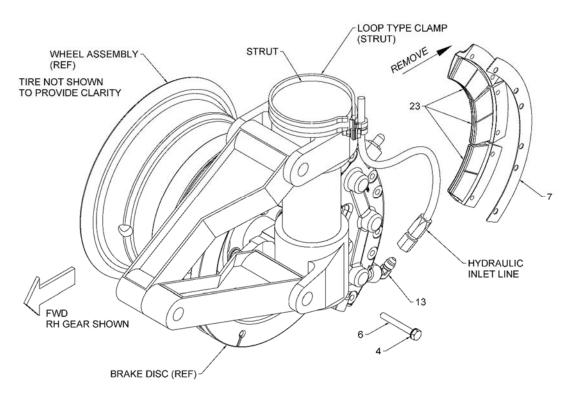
Remove the back plate assemblies (23) and shim (7)
